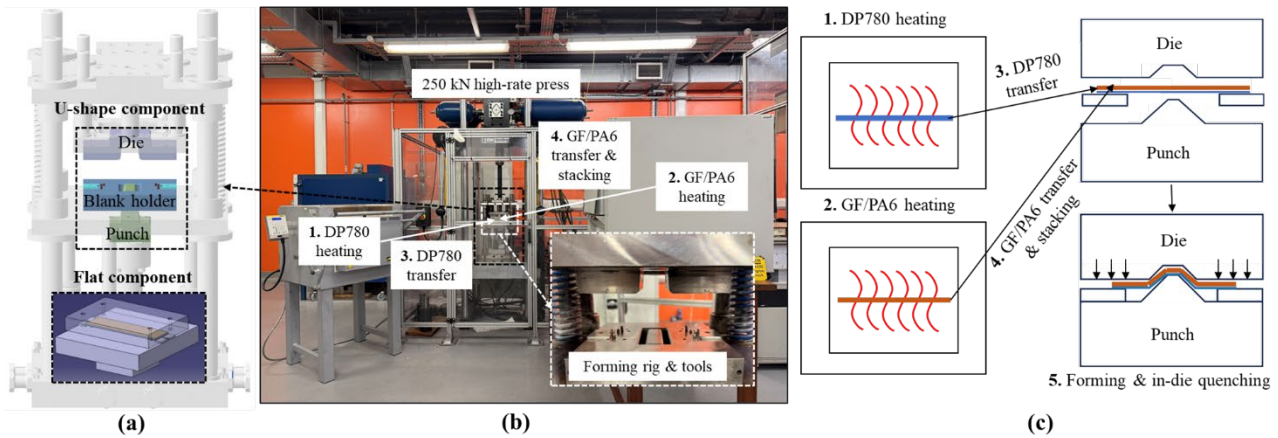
(a) Design of the forming rig and tool sets for forming U-shaped and flat components; (b) laboratory equipment layout, with the corresponding one-shot stamping steps indicated; and (c) schematic illustration of the one-shot stamping process.
